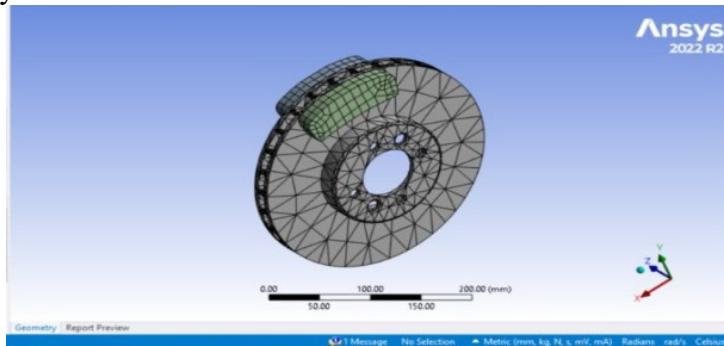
The finished discretized mesh for the assembly of the brake disc and brake pads
